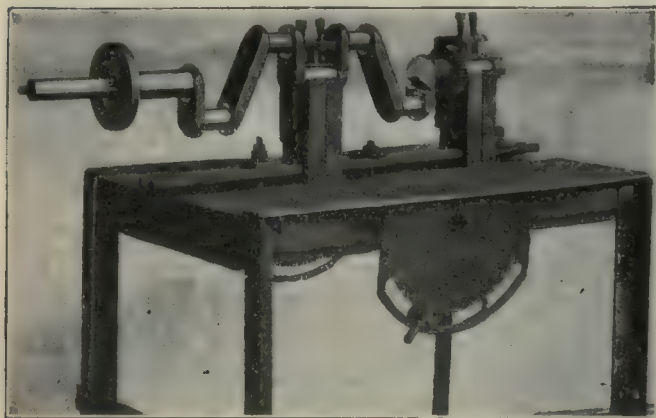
AN ADJUSTABLE CRANKSHAFT JIG
